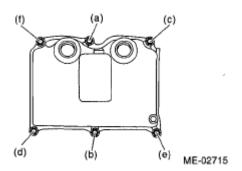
Identifying Rocker Cover Bolts - RH Side Courtesy of SUBARU OF AMERICA, INC.
